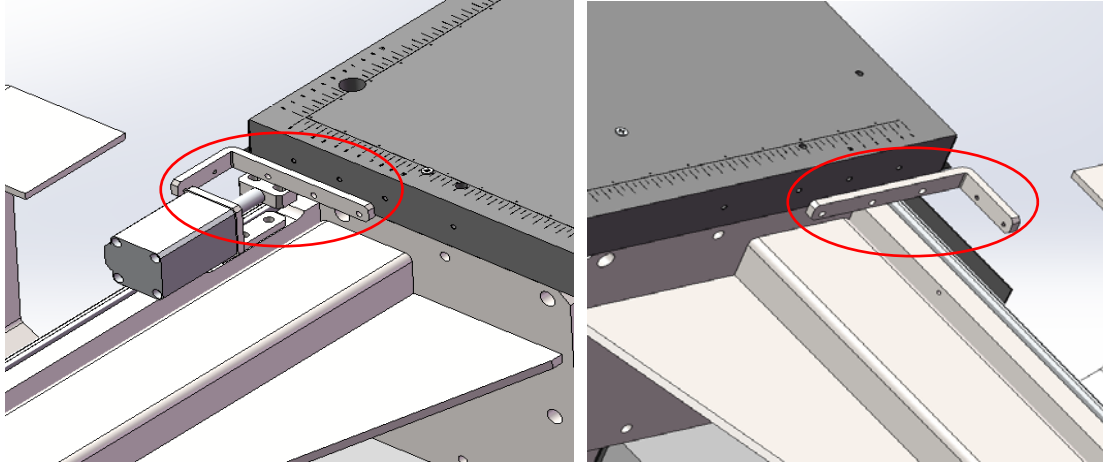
Installation of left rear side cover bracket and right rear side cover bracket
